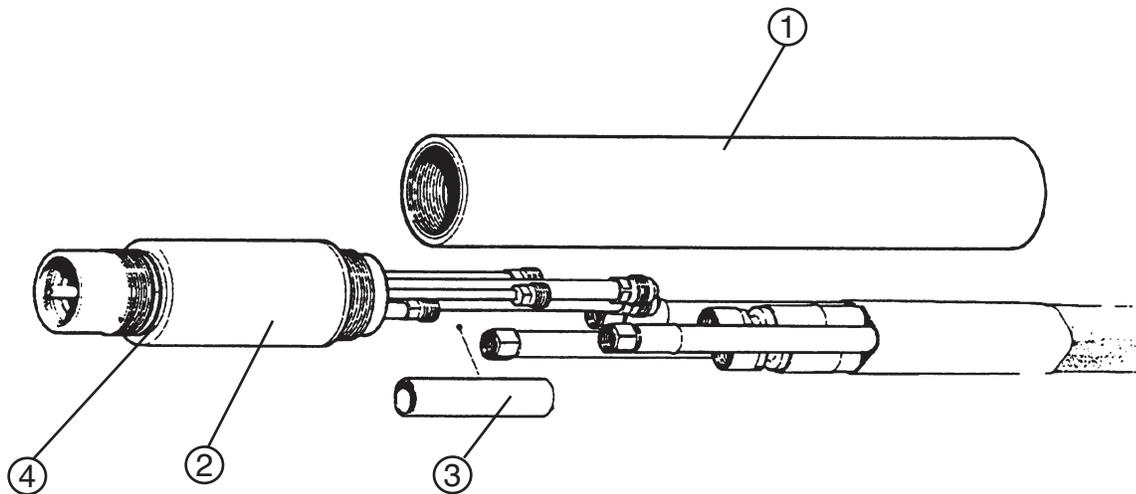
MAX200 Machine Torch Assembly (Optional)
